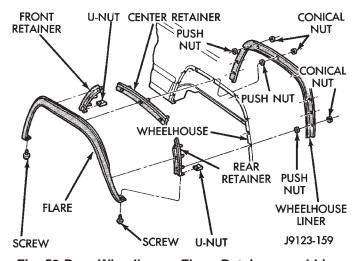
Rear Wheelhouse Flare, Retainers and Liner
